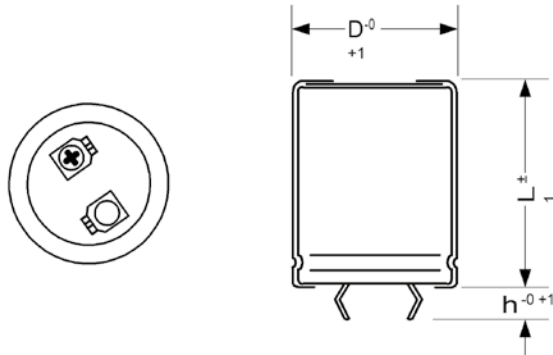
SIH - Standard 2 pin snap in version and mounting hole dimensions (mm)
